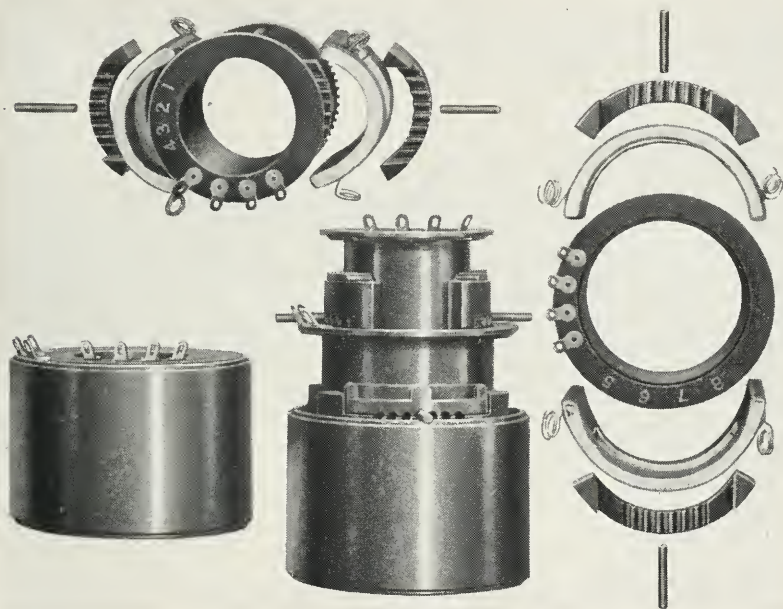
Constructional details—deflection coil design for AN/APQ-7 radar bombing equipment.
